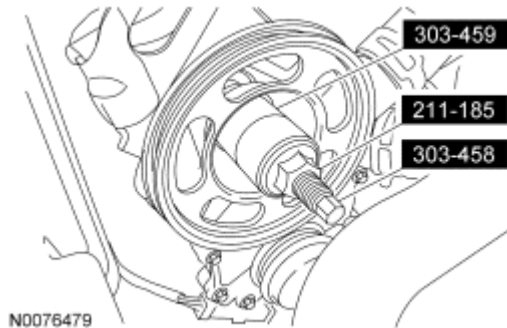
Installing Coolant Pump Pulley Using Special Tools (211-185, 303-458, 303-459)
